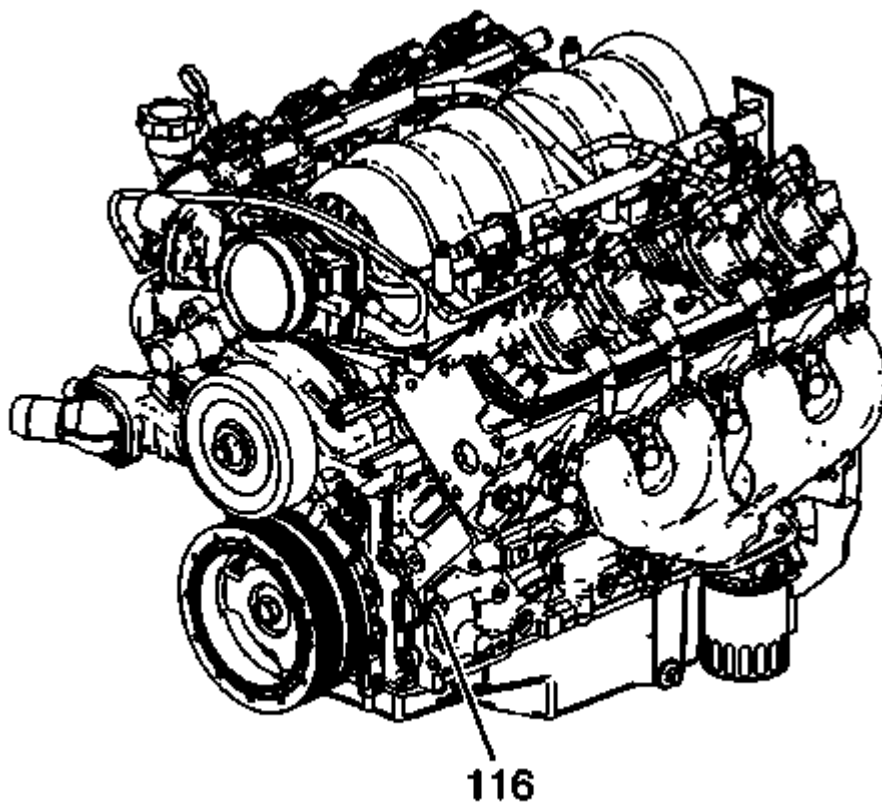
Locating The Engine Block Left Front Oil Gallery Plug
